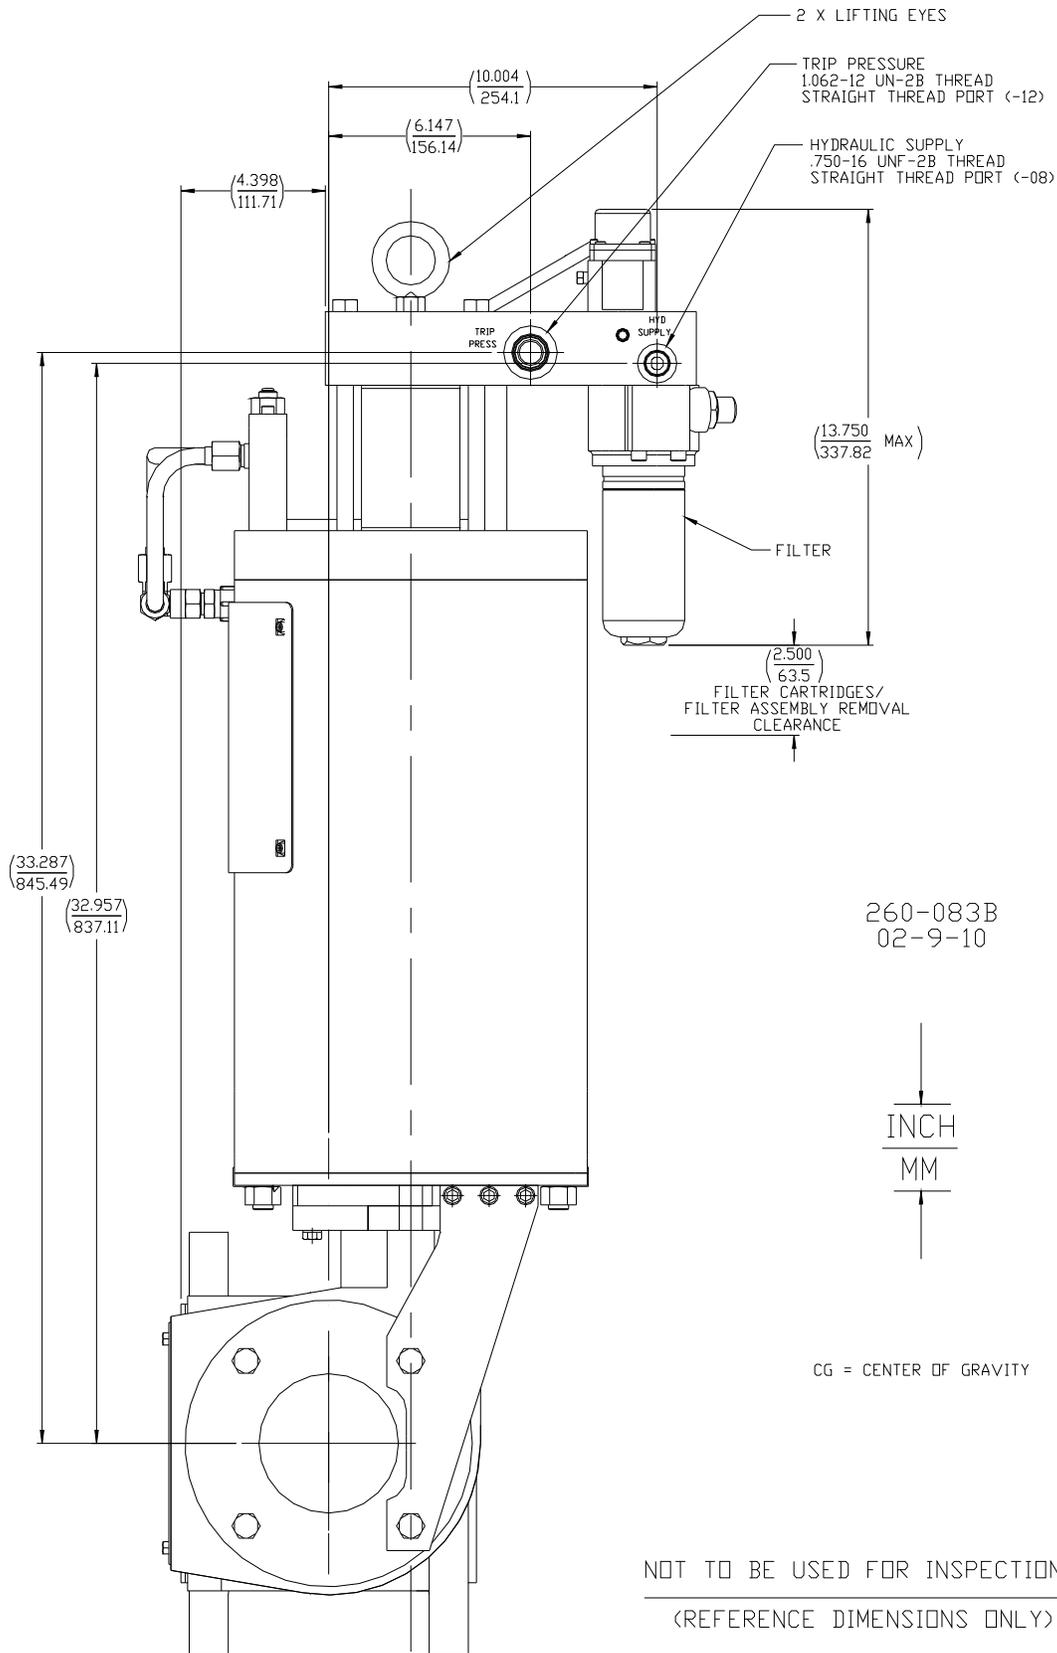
Gas Stop/Ratio Valve Outline Drawing (6-inch, SS-260)
